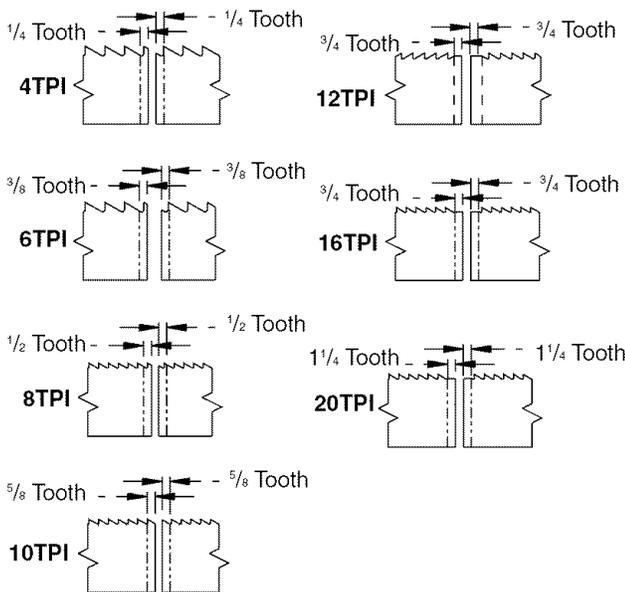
Tooth Spacing (TPI = Teeth per Inch)
